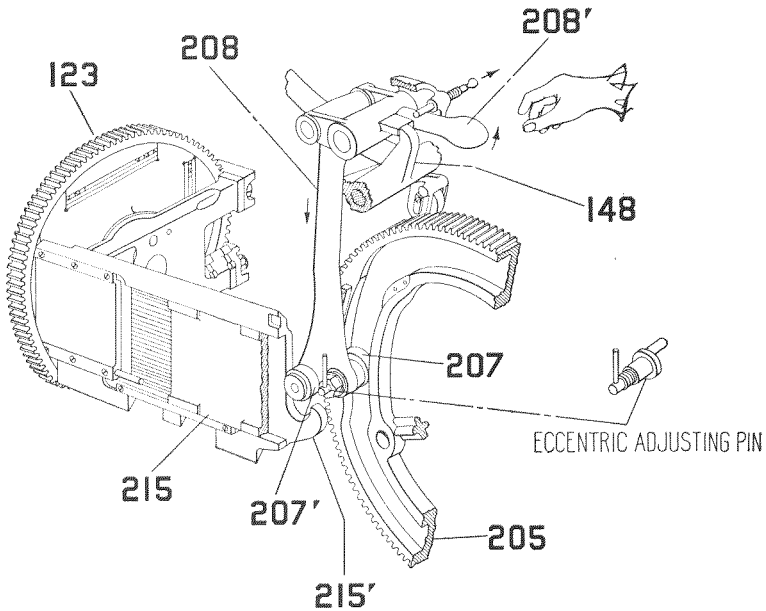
View showing the mold mechanism and the means of connecting and disconnecting the mold slide. In the view given the rolls 207' and 207 mounted on the mold cam lever are shown lifted, the handle 208' being underneath a little spring pin which holds it in its position. By pulling this spring outward the handle 208' is allowed to rise, lowering the mold cam lever 208 into position to connect with the ejector slide.
